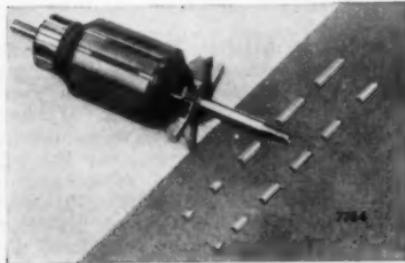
Small motor armature and extruded aluminum balancing weights which are pressed into the slots.
